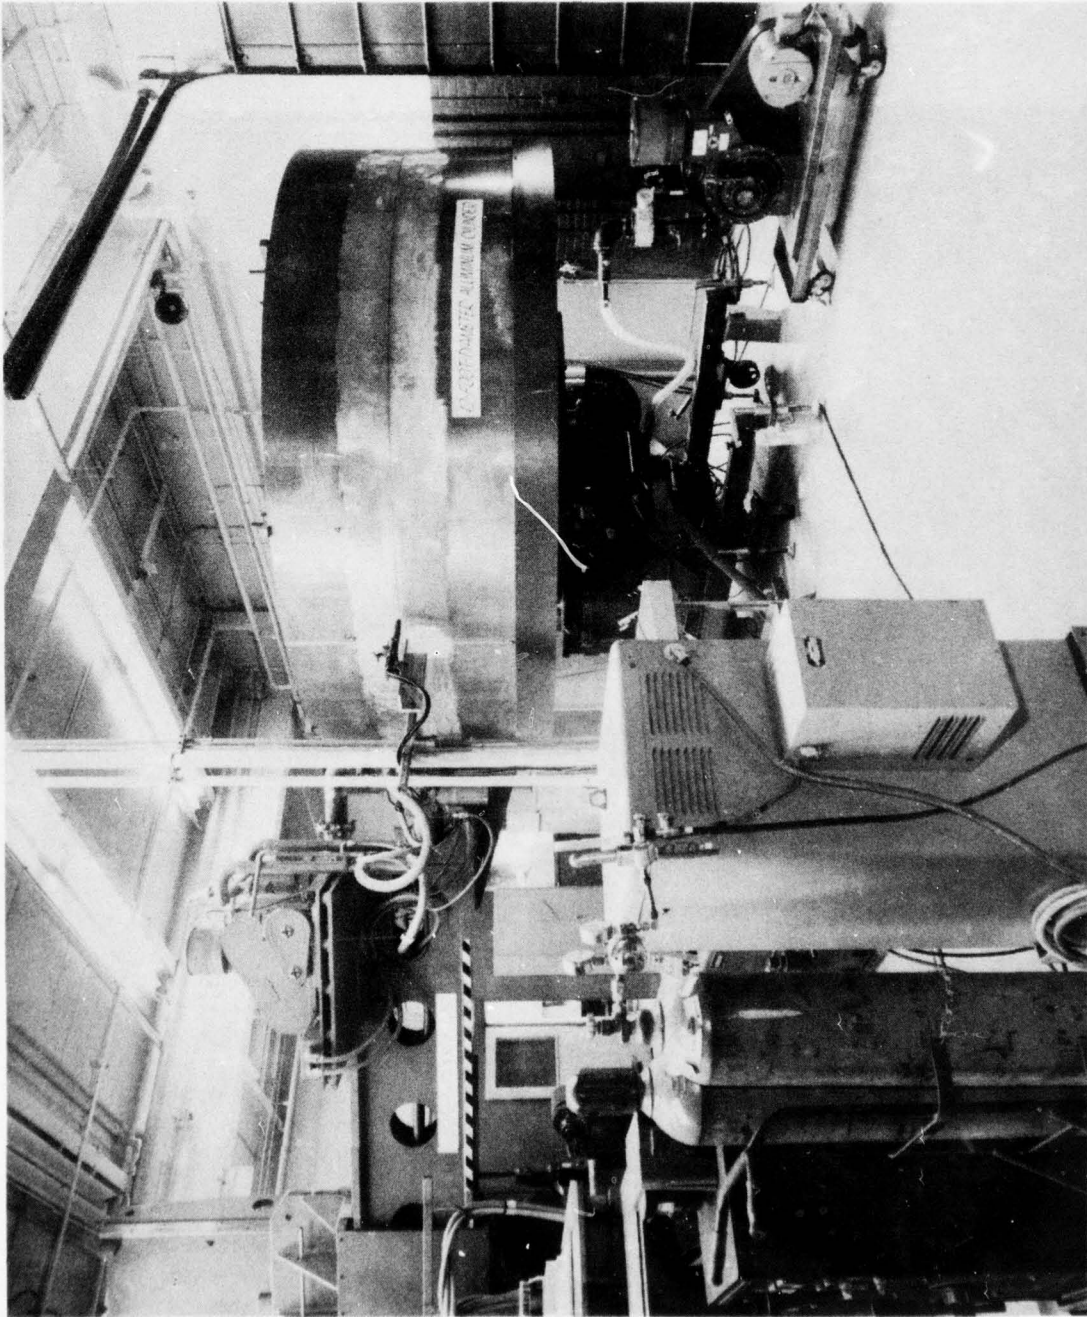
Cylinder in Position For GTA and SSEB Welding
